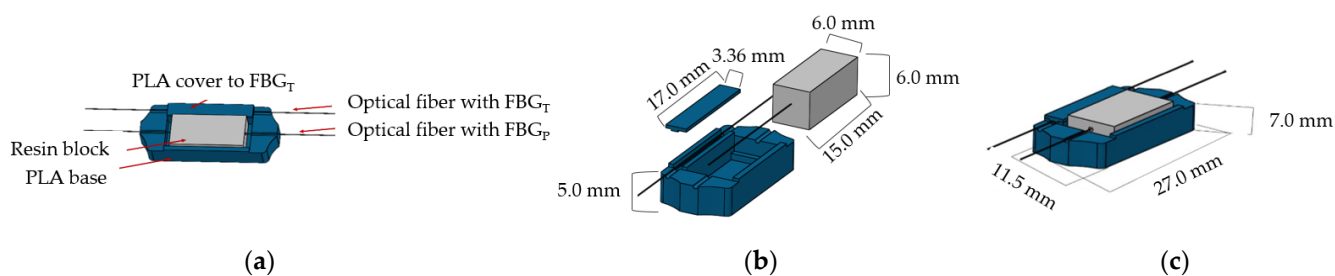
3D design of sensor cell with: (a) all components; (b) components dimensions; and (c) final assembled sensor cell with its dimensions.
